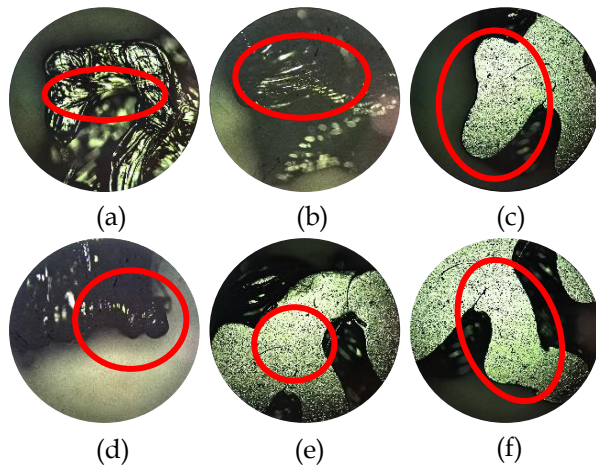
Test 1; P.S.-20 mm/s, R.S.- 40 mm/s; (a) String; (b) Layer shift; (c) Shape deformation; (d) Excessive material; (e) Voids; (f) Nonuniform layer width
